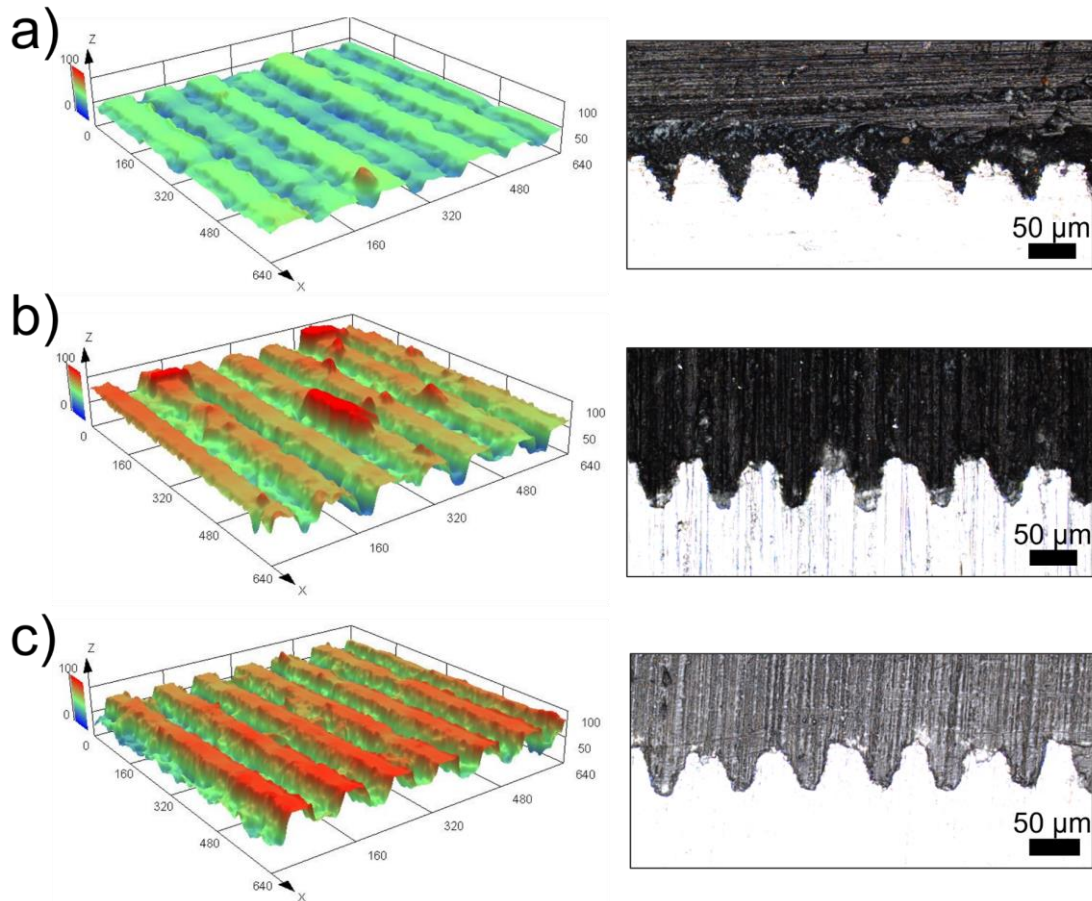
On the left-hand side laser confocal microscopy images of polymer fracture surfaces and on the right-hand side color images obtained in the laser confocal microscope of the cross-section of PC/AA6061 joints injection overmolded under the following conditions: a) C1 (minimum levels); b) C9 (center point - CP); and c) C4 (maximum levels). Metal and polymer parts appear as light and dark, respectively.
